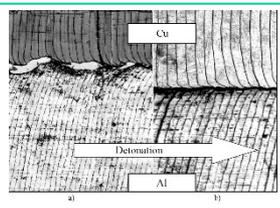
Impact velocity contact on deformation picture in model cross-layered samples when welding with aluminum (cut on modeling lateral inserts welded specimens when V_k = 2600 m/s; a-Vk = 200 m/s; b-Vk = 2600 m/s; c-Vk = 2600 m/s).
